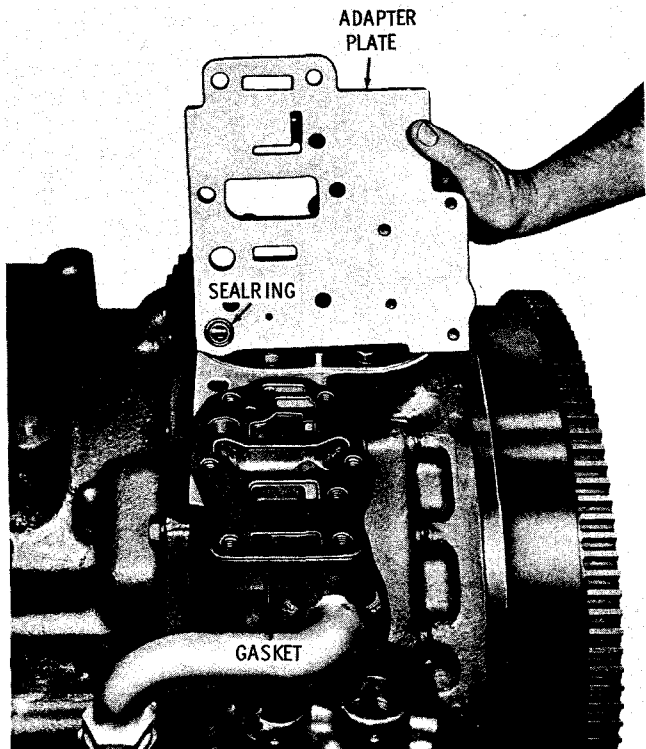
Installing stator control valve adapter plate (VCLT, VCLBT)
